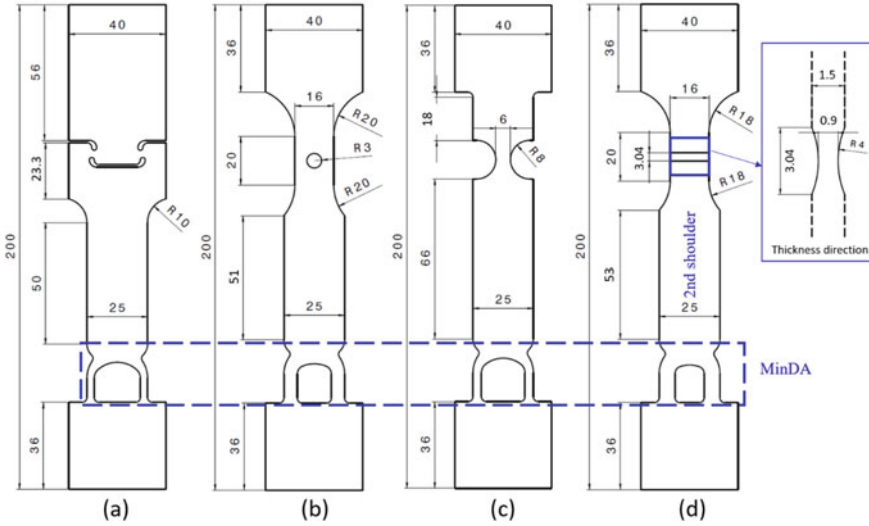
Geometry and dimensions of fracture specimens. a SH, b CH, c NT, d PS
